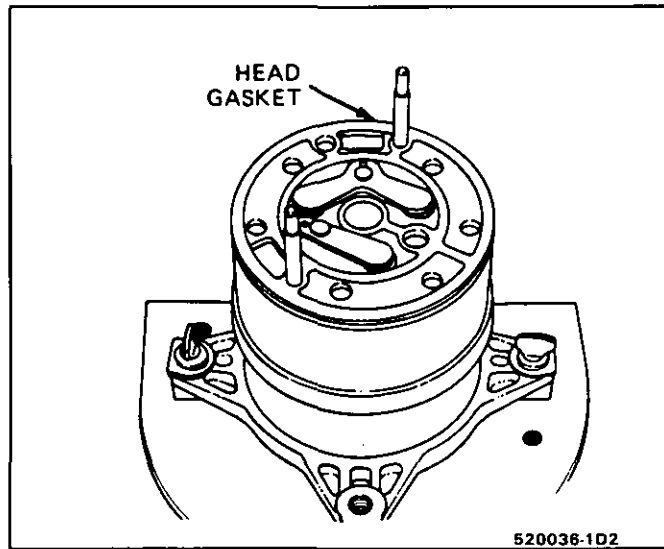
Head Gasket Assembled Over Rear Valve Plate
